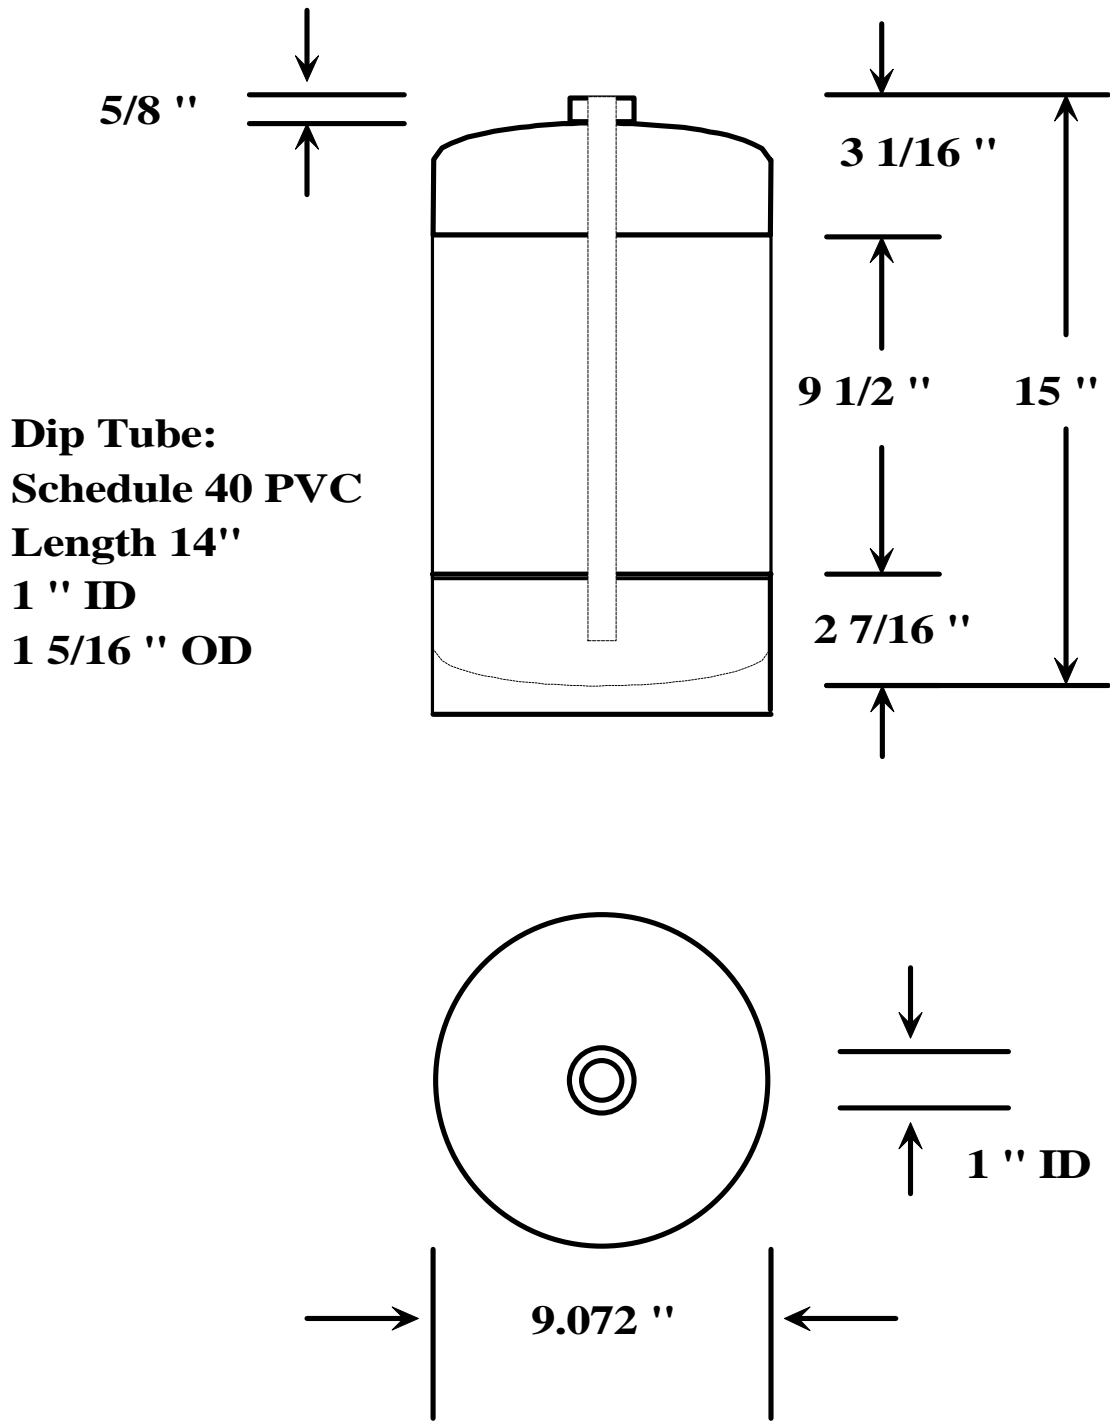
IND 25/21 Cylinder - Basic Dimensions.
